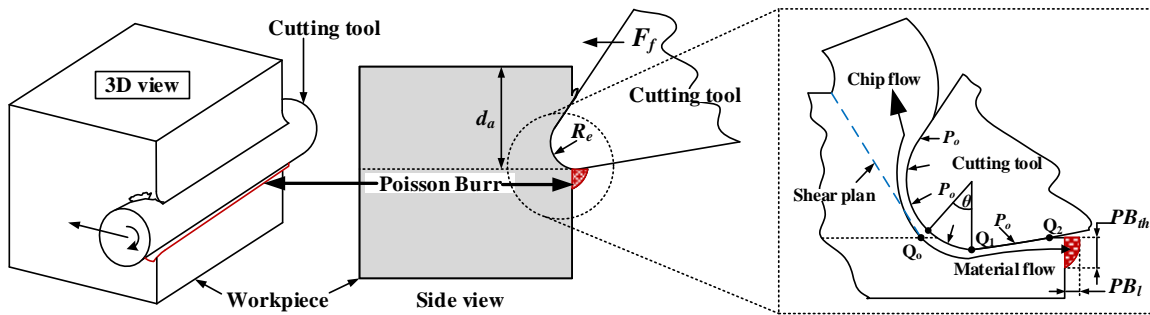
Poisson burr formed when cutting tool pushed into workpiece⁹⁾.
